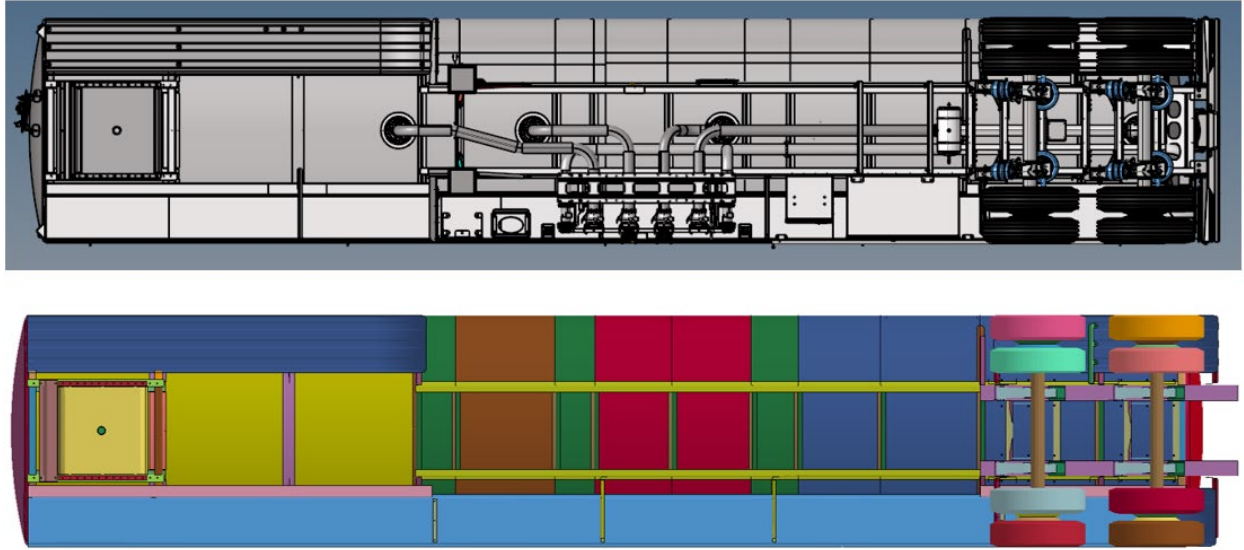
LBT Inc. Trailer Model Bottom View (Top) and LS-DYNA Model Bottom View (Bottom)
